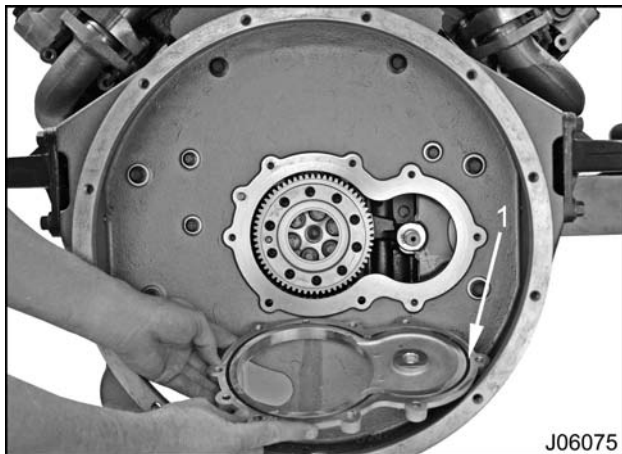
Installing the rear oil seal carrier (stripped chassis)
